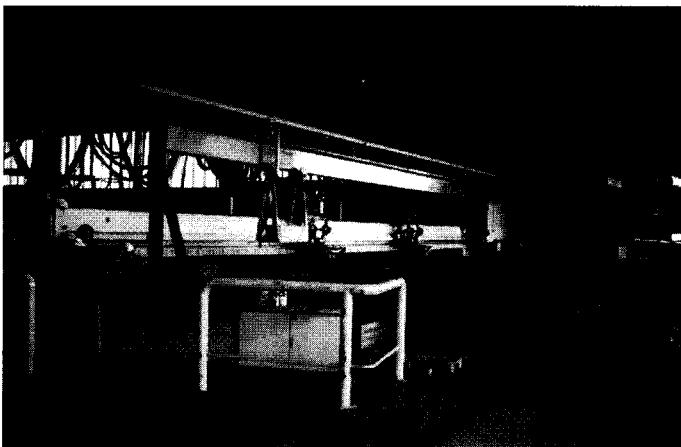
Flat Panel Line Start and One-sided Welder
